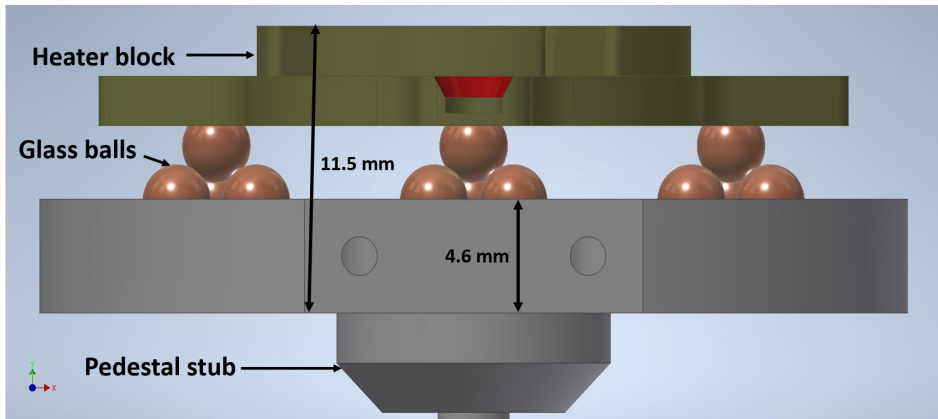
CAD drawing of the cross-section of the heater block mounted on the pedestal stub using 3 tetrahedron configurations of glass balls.
